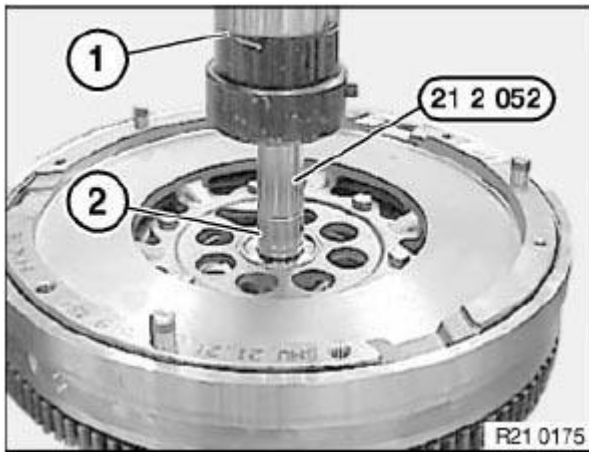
Hydraulic Press, Roller Bearing And Special Tool (21 2 052)
